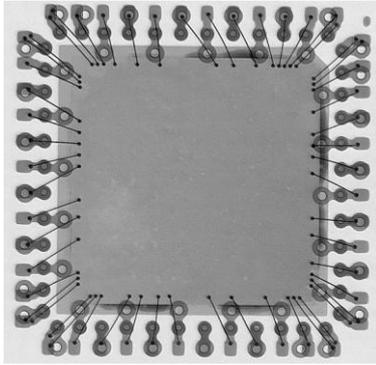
X-ray radiography of a packaged QFN-FlexPac to determine possible failures of gold bond wires due to mass flow during molding.
